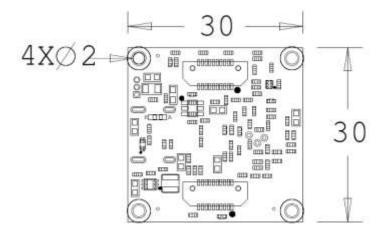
Front Portion of See3CAM_CU135 Base Board mechanical dimensions
